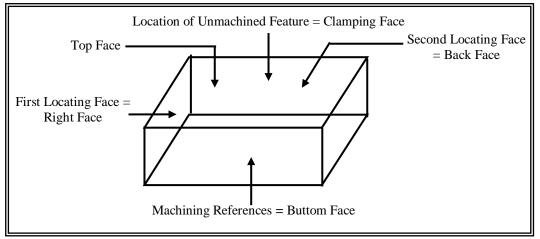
The Rule Used in Constraint Uniform Polyhedra Workpiece.
